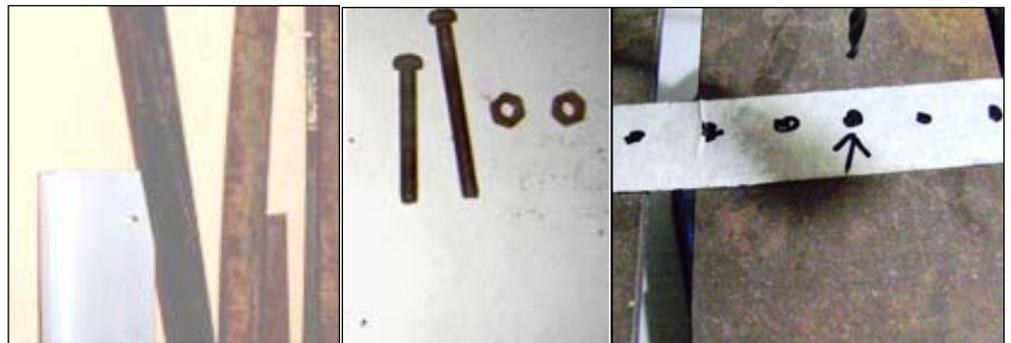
Plates, screws and nuts used for making the improvised external fixator.
